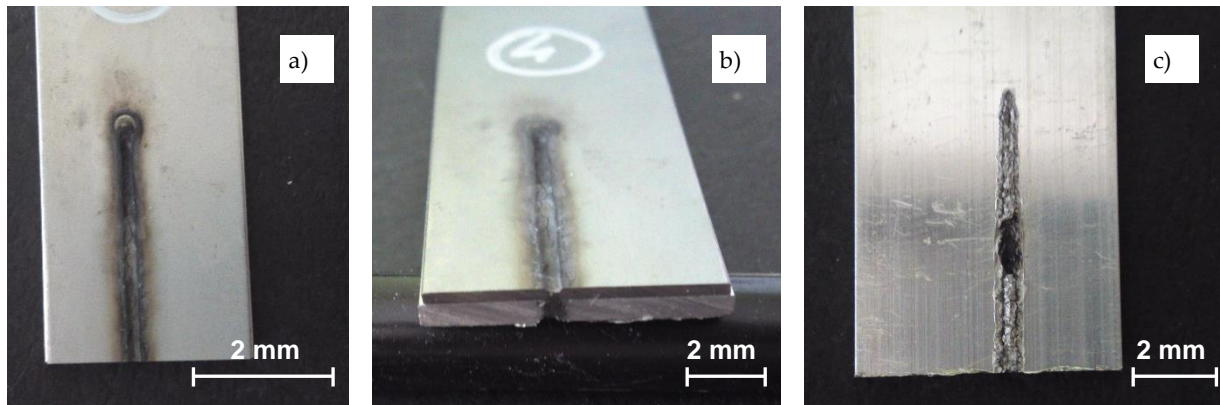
Sunken weld face a) weld cross-section; b) weld ridge – high porosity visible; c) sample No. 4
